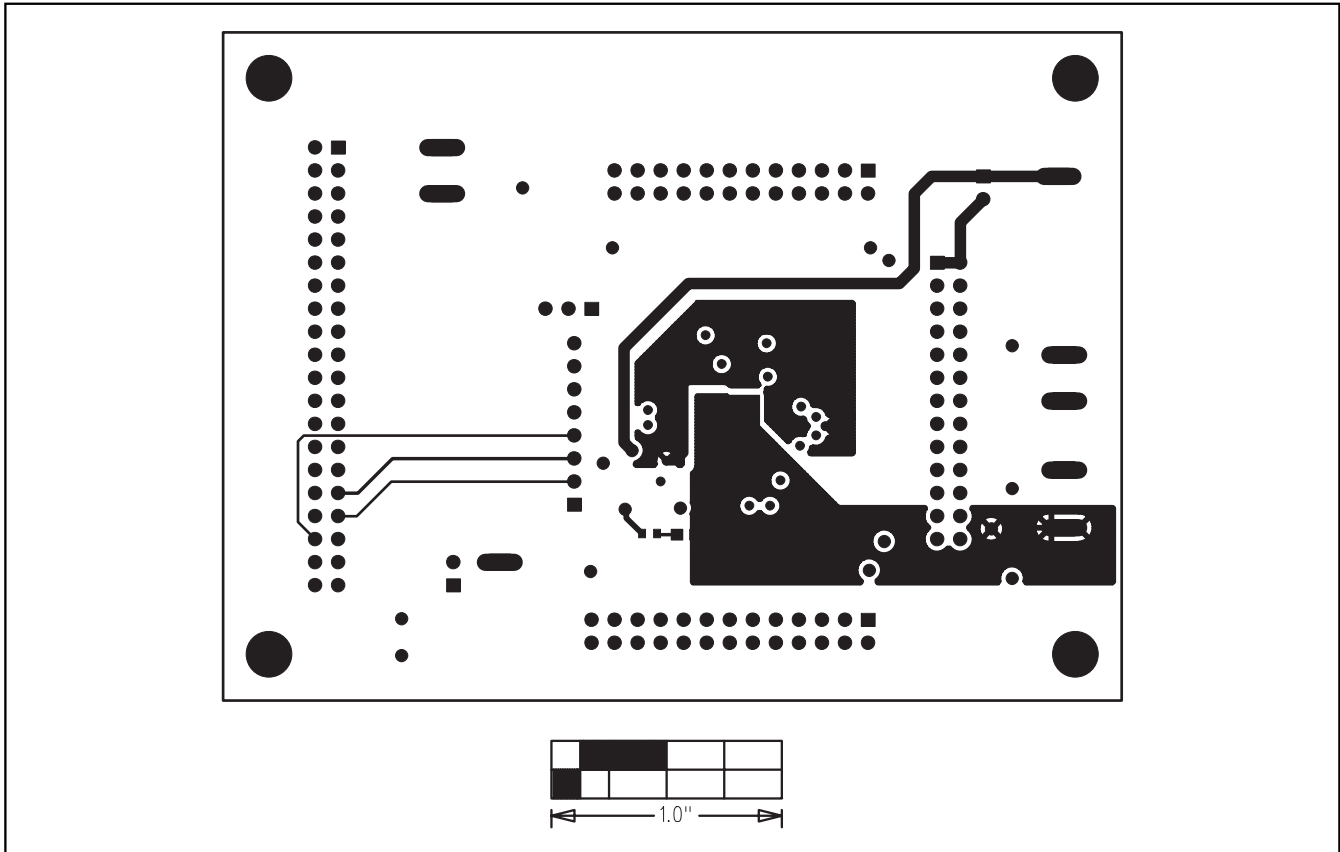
MAX5734 EV Kit PC Board Layout—Solder Side
